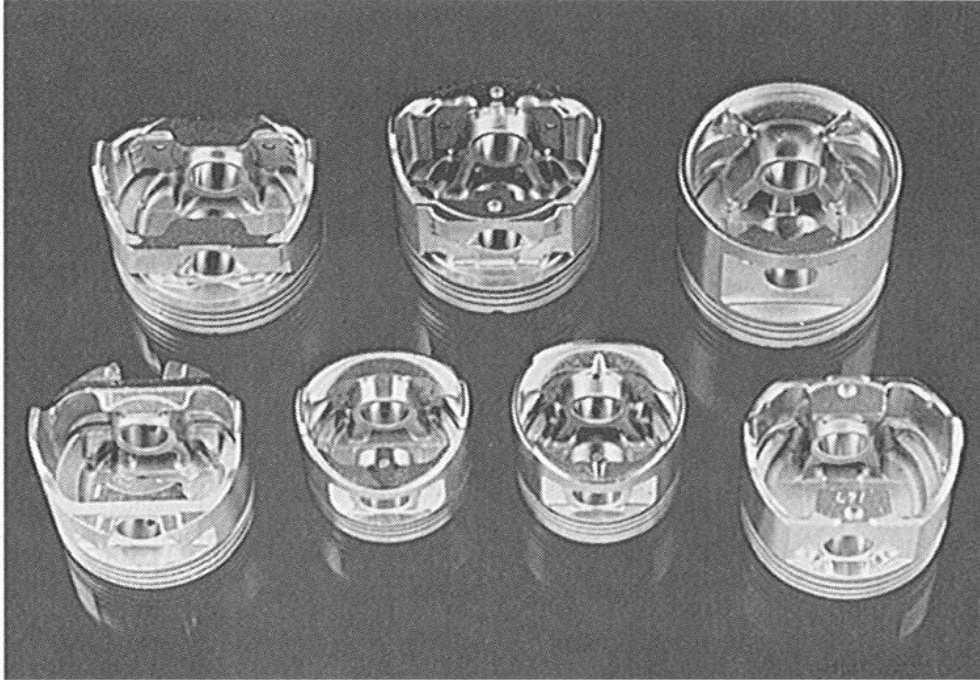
Truck and car pistons, mass-produced by the millions using permanent mold casting. (Courtesy of Central Foundry Division of General Motors Corporation.)
